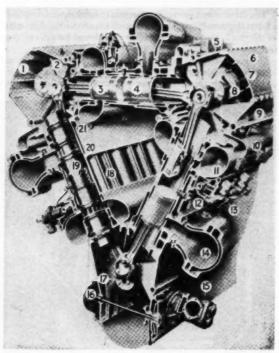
SECTION ACROSS NO. 5 BANK OF CYLINDERS OF THE DELTIC OIL ENGINE
